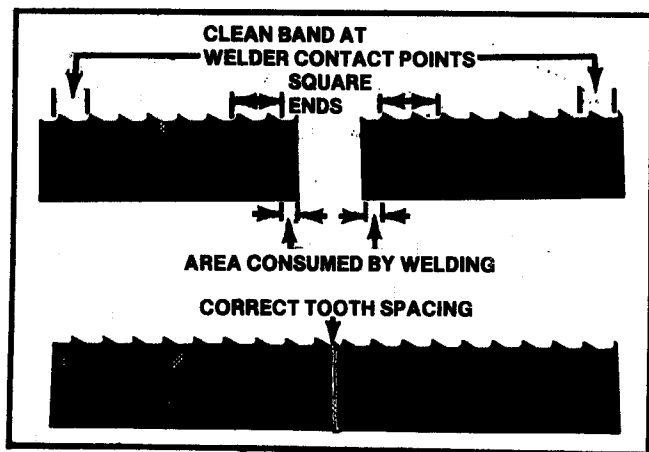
BAND PREPARATION FOR WELDING.
